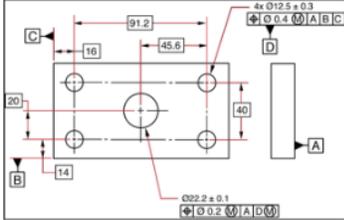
Inadequateness of Traditional Dimensioning and Tolerancing
